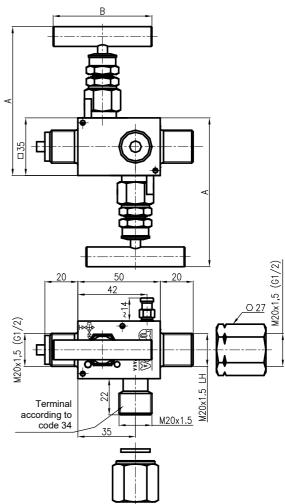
MANOMETRIC VALVE WITH INNER THREADS 967 61 ..., dimensional drawing, scheme, application
